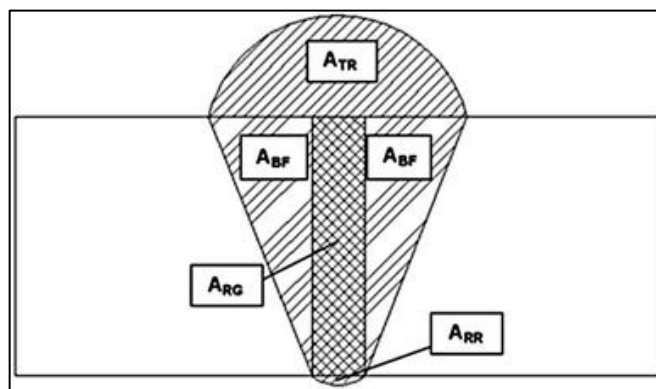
Weldment joint dilution calculation schematic view sample.
